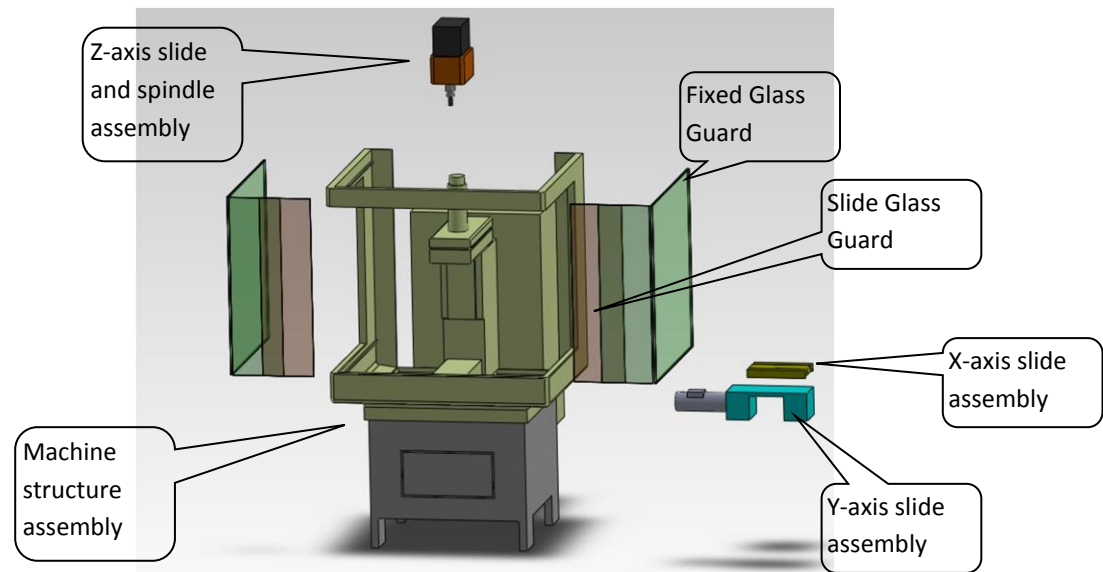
General layout for 3D assembly model for CNC Vertical milling machine, explode view.
